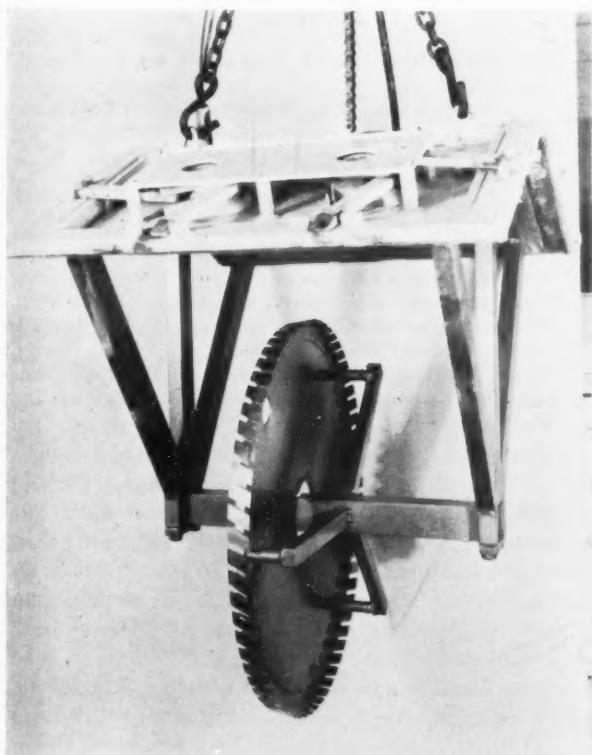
Fixturing of stainless steel jet rotor compressor disc.
